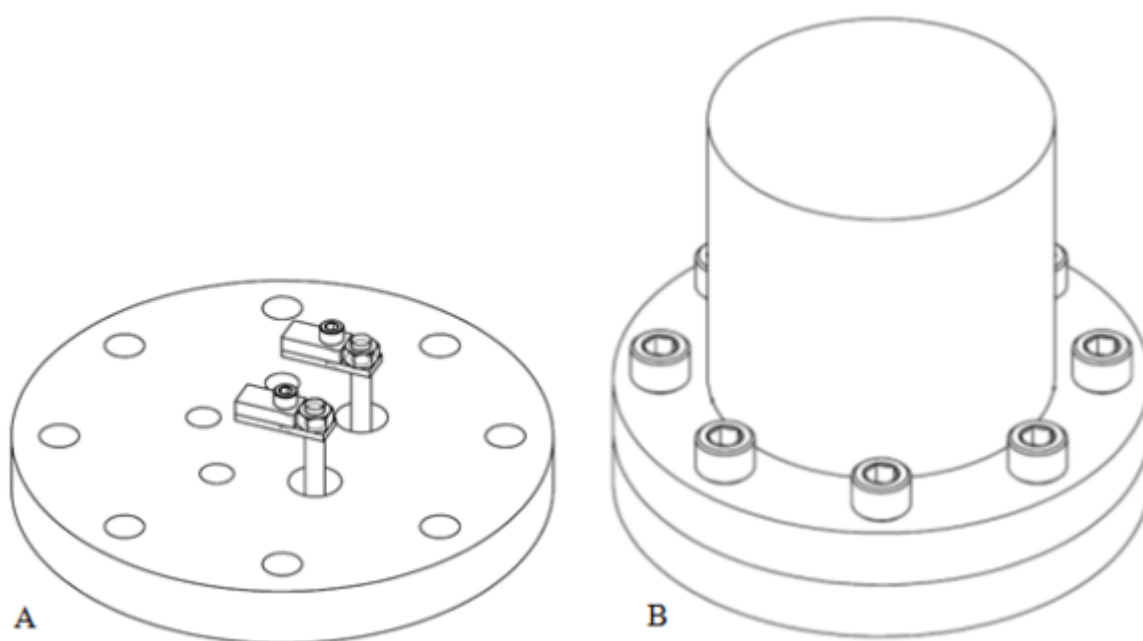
Isometric views of the pressure vessel (A) with copper studs and plates and (B) with socket bolts and top hat.
